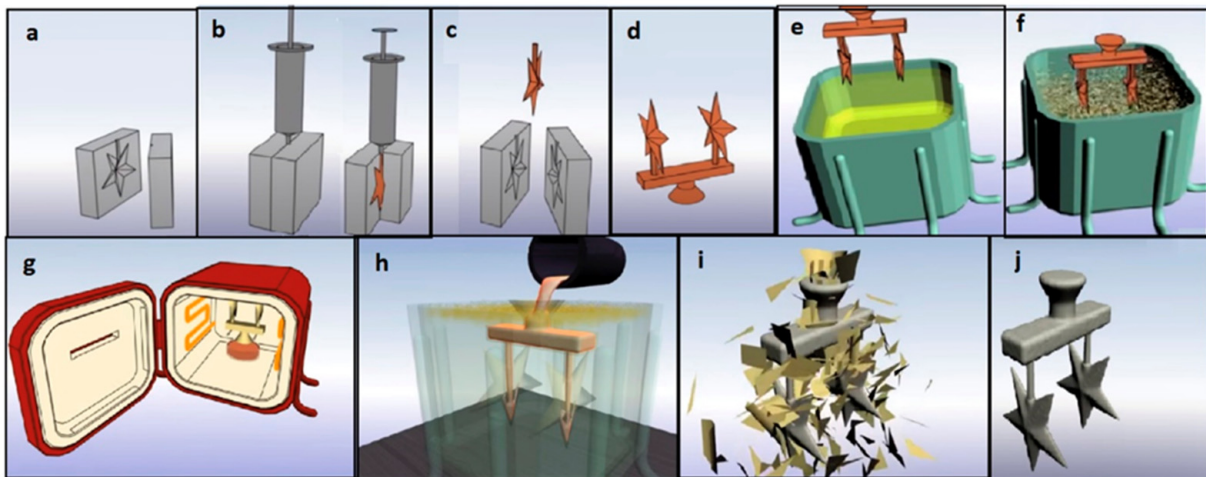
Conventional investment casting: (a) Preparing a metal mold for wax injection; (b) injecting wax to create patterns; (c) ejecting wax from the mold; (d) assembling wax patterns into a tree; (e) ceramic slurry coating; (f) coating with stucco; (g) dewaxing by heating; (h) pouring metal; (i) removing a ceramic shell; (j) a cast part that is prepared to be severed from the assembly [1].
